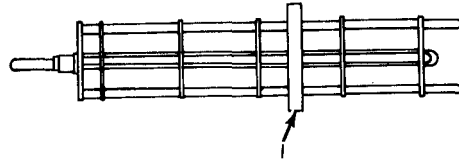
Voltmeter, Electronic ME-247/U or ME-247A/U, Terminal Board, Front Assembly.
